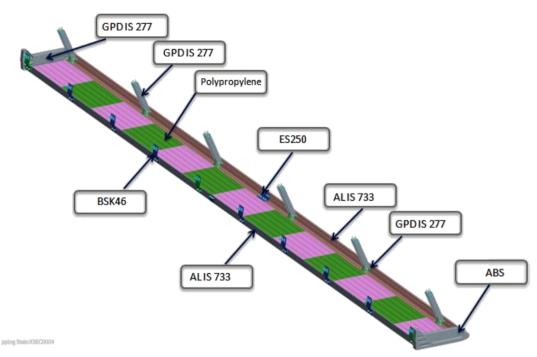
Hatrack assembly of buses manufactured by VECV Ltd. (Weight of above assembly: 40 Kg)
